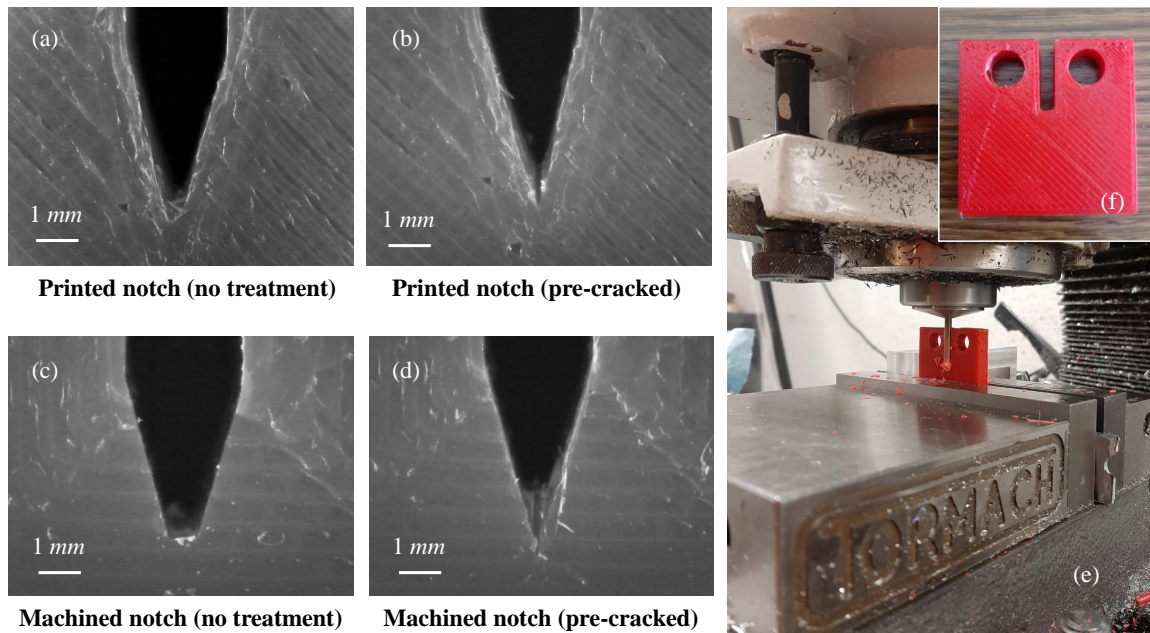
Example notches, (a) printed with no treatment, (b) printed and pre-cracked, (c) machined with no treatment, (d) machined and pre-cracked, and (e) notch machining process with (f) example ABS specimen before notching.
